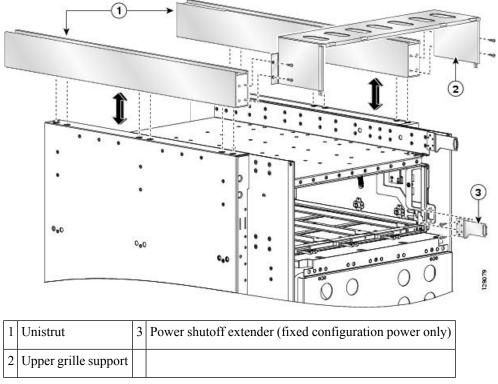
Removing the Unistrut, Grille Support, and Power Shutoff Extenders—Fixed Configuration Power Shown
